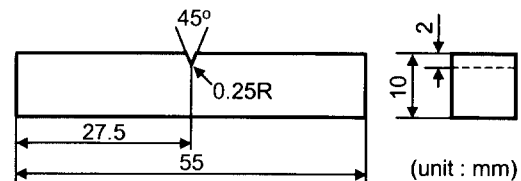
Dimensions of the Charpy V-notch impact test specimen.
